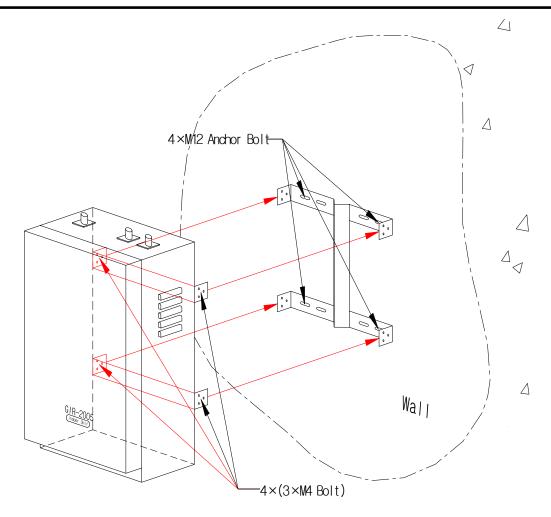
Assemble Wall Bracket with GIR-2005 Chassis Bracket
